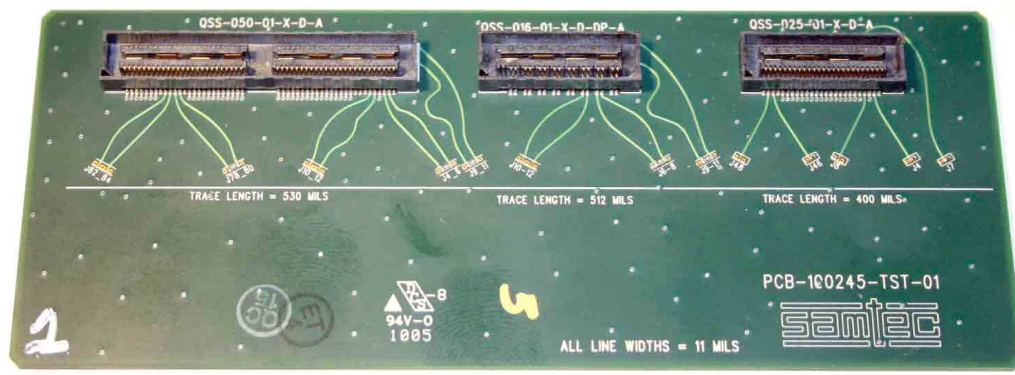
Mated PCB Test Fixture with Mounted Test Connectors
